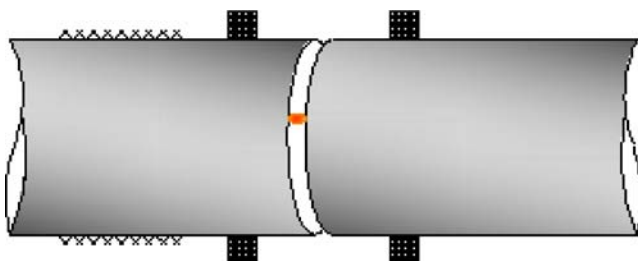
Magnetically impelled arc butt welding—phase 3
